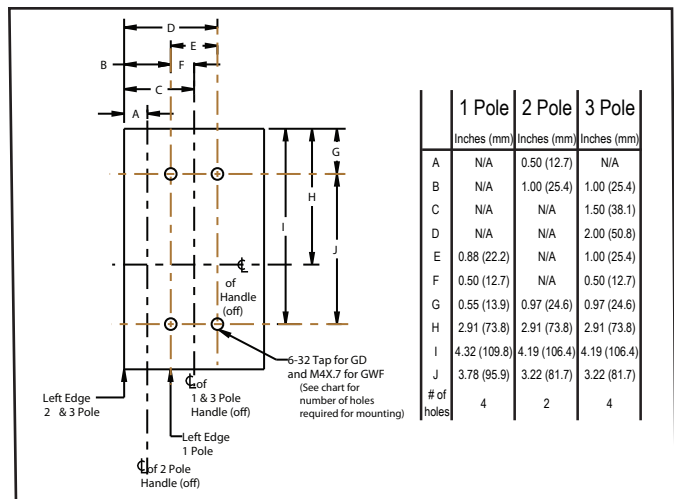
Circuit Breaker Mounting Bolt Drilling Plan
